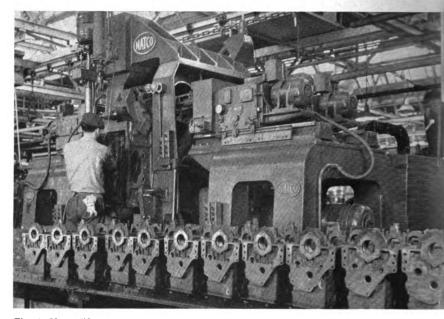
Natco "drum-type" drilling machine. At the time the picture was taken, a few block had "banked" up ahead of the operator.
